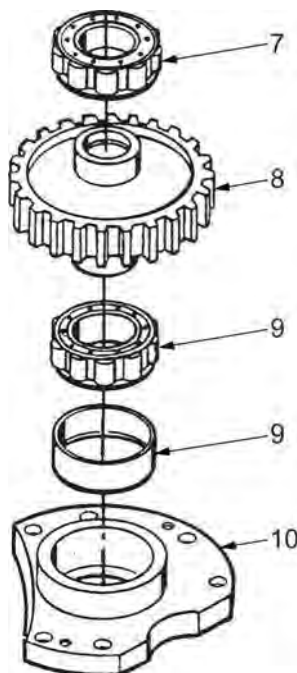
Hydrostatic Pump Idler Gear and Bearing Retaining Plate Bearings Installation.
